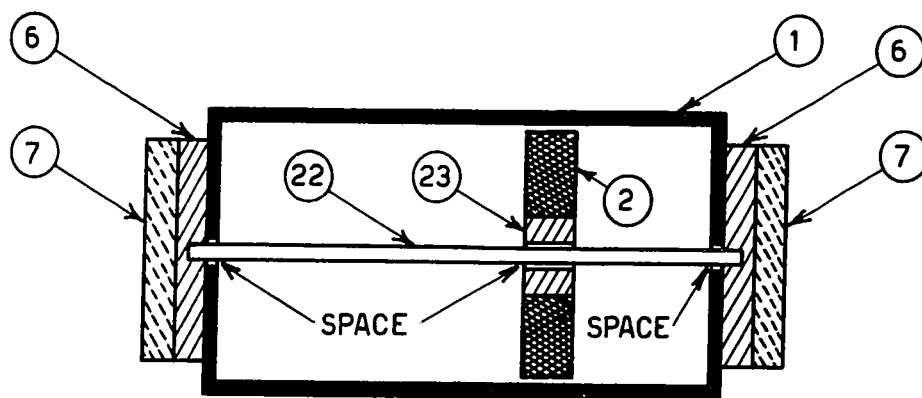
PARTIAL CROSS-SECTION OF SUPPORT ROD ARRANGEMENT
